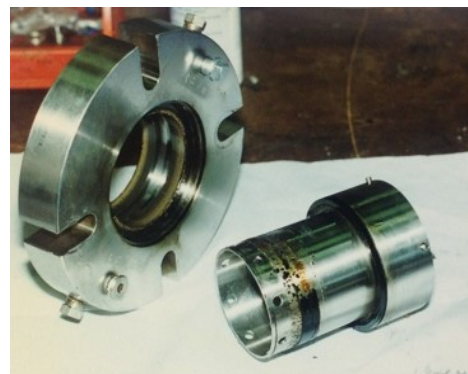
Mechanical seal, contaminated and damaged (Svartsengi binary power plant)
